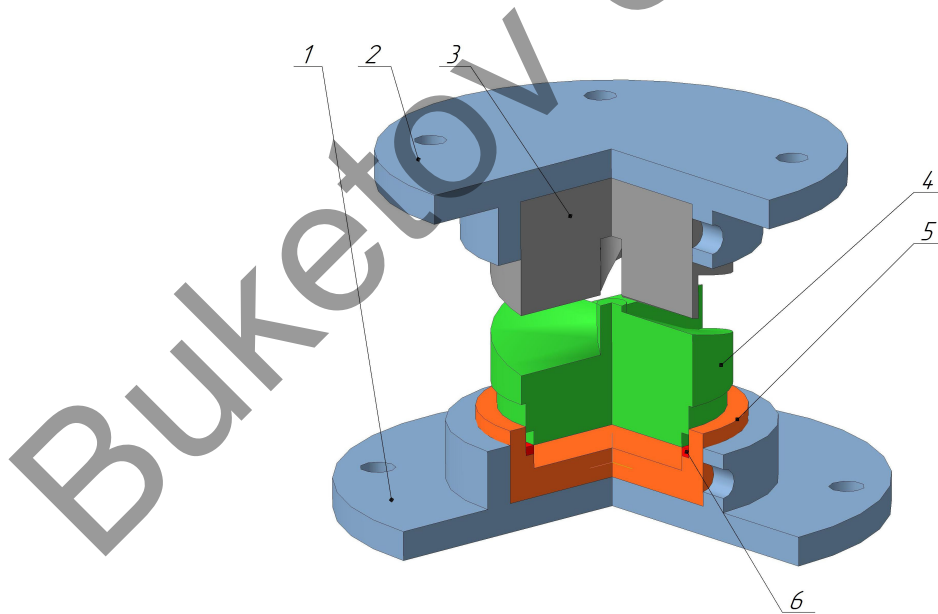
General view of the complete construction: 1 - bottom carrier, 2 - top carrier, 3 - upper striker, 4 - lower striker, 5 - matrix, 6 - piston ring.
